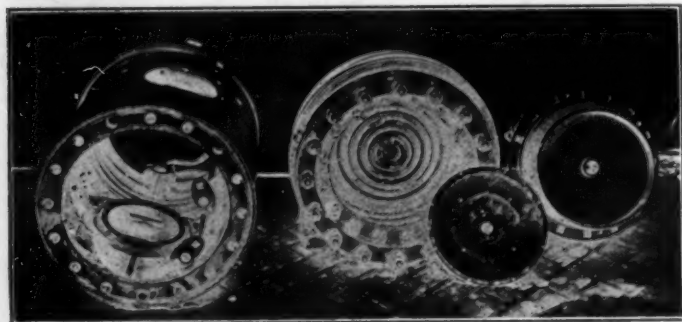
ONE OF THE DIESEL ENGINE PISTONS TAKEN APART
